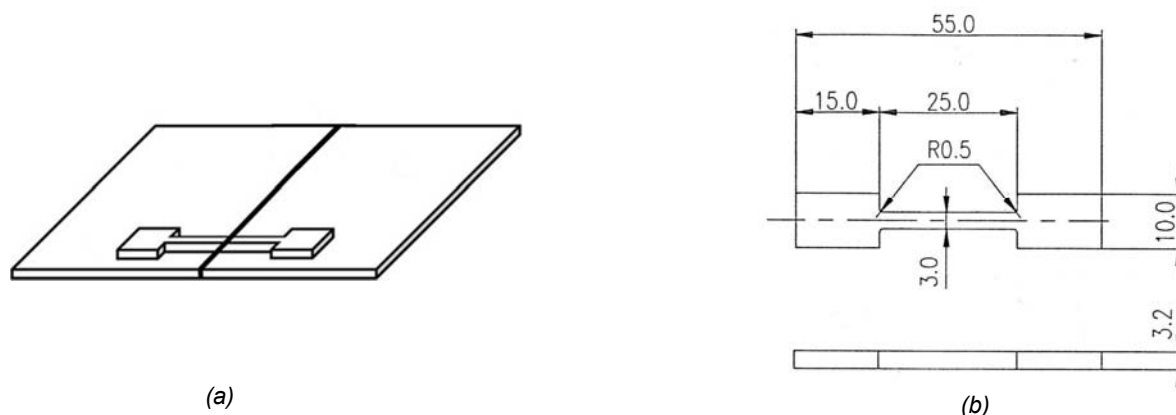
Creep specimen (a) Configuration; (b) A drawing
